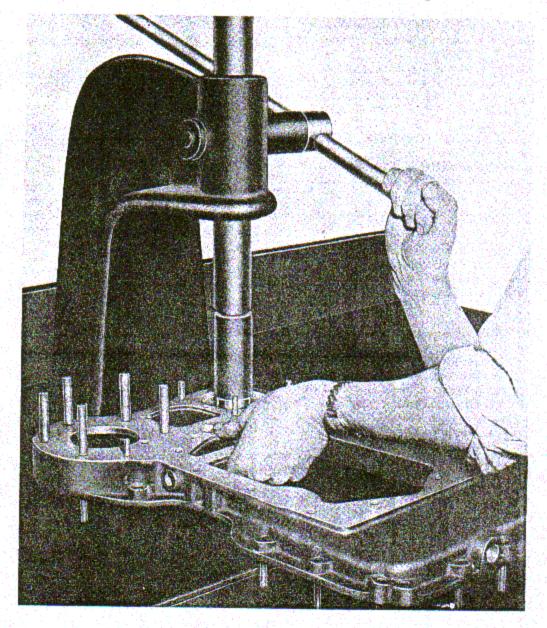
Installing Upper Hydraulic Pump Gear Oil Seal (Typical)
